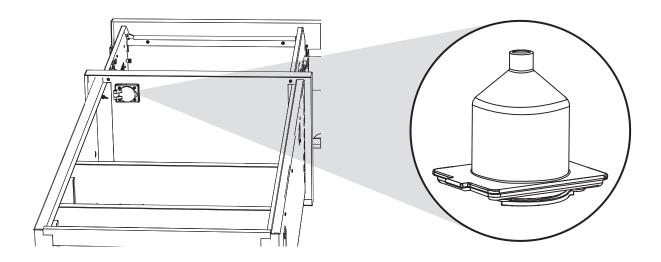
, Bottom-Up View of UPE and GEM Configuration with AC Boot (Inset: Side View of AC Boot Installation)
